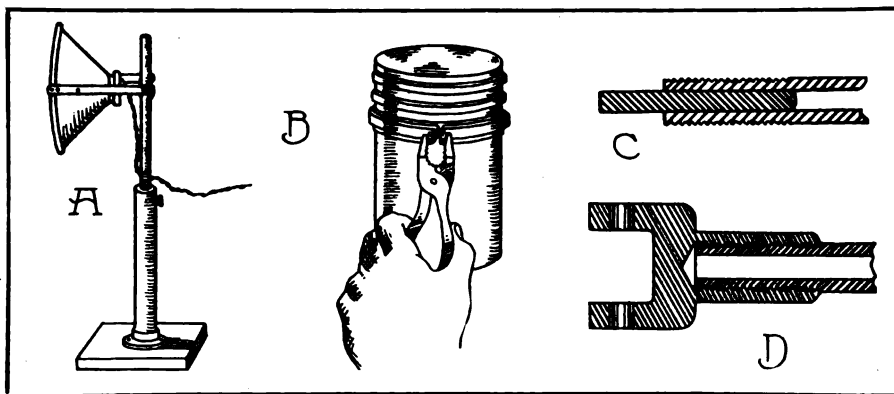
A, Home-Made Washstand Light; B, Handy Piston Ring Compressor; C, Expanding Tie Rod Tube; D, Repaired Tie Rod.
